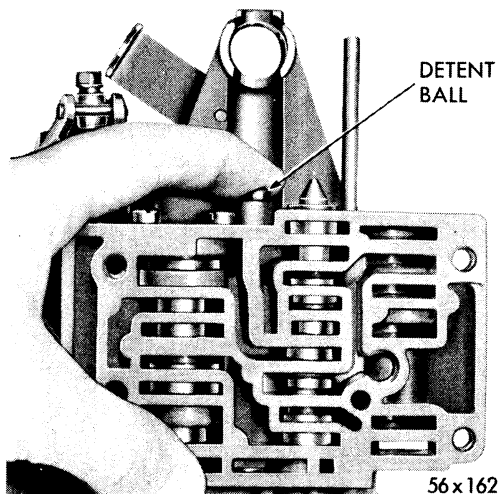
Holding Manual Valve Lever Detent Ball in Position
